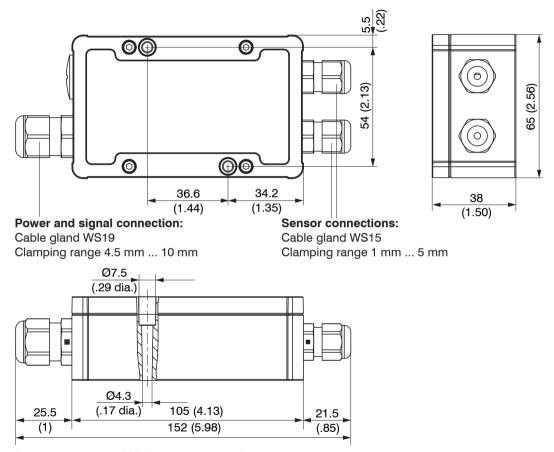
Dimensions of MSC7802 controller, dimensions in mm, not to scale
